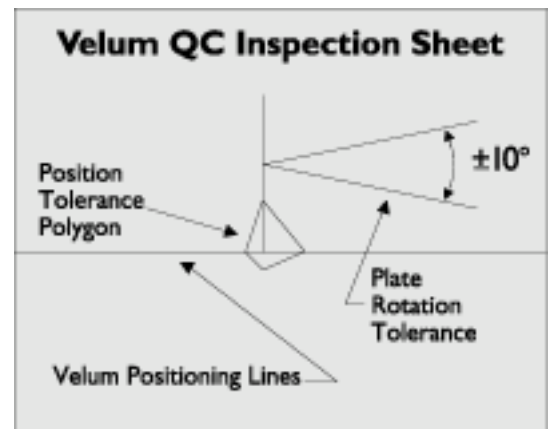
JOINT QC DETAIL FOR INSPECTION ON A VELUM SHEET.
